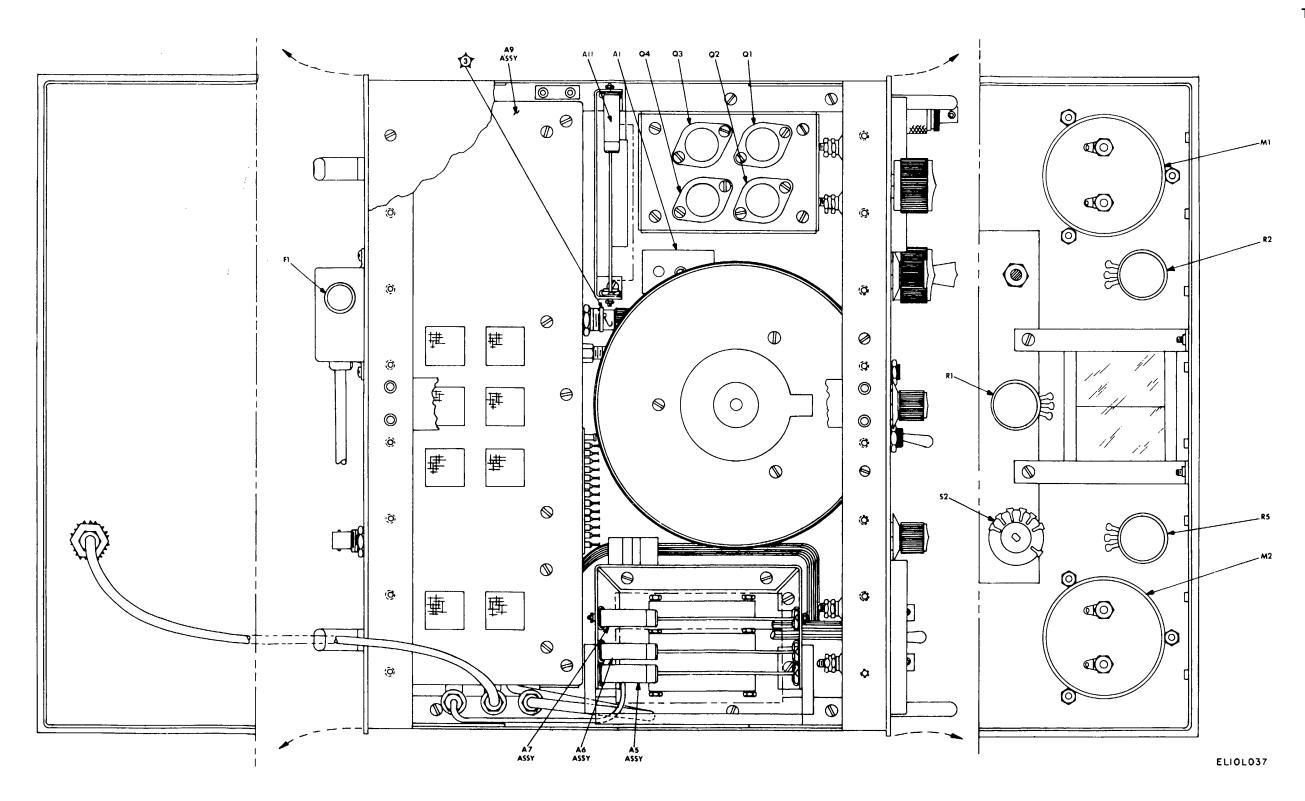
(1). Main chassis parts location (sheet 1 of 2).
